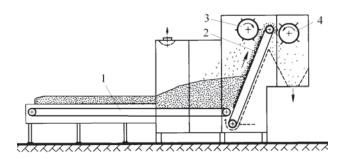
Blending opener: 1 – conveyor belt; 2 – inclined lattice; 3 – evener roller; 4 – detaching roller.
